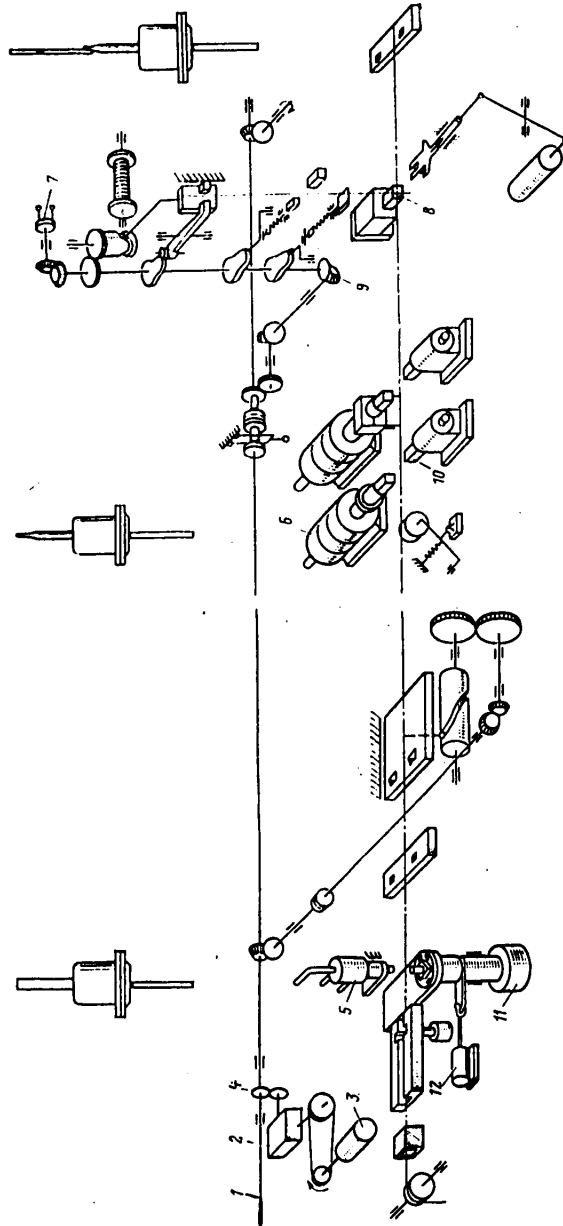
Kinematic schematic showing the operation of the ring welding, strip transport, tube swaging and welding as well as the upper lead welding mechanisms.
